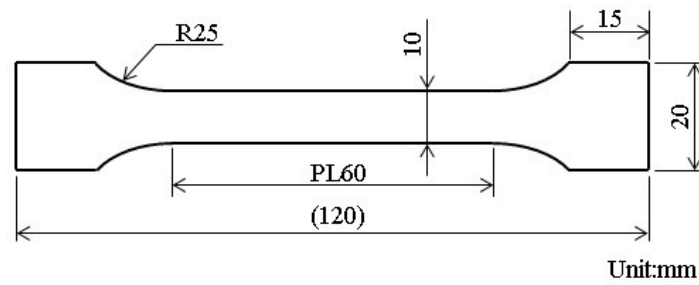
Shape and sizes of dumbbell specimen for tensile test (Thickness = 3.0 mm).
